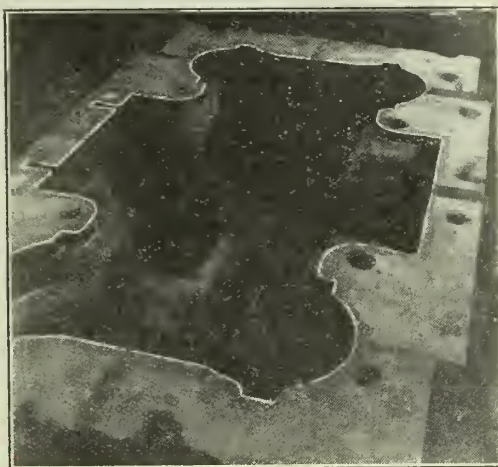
THE CARCASS OF A BED PLATE MOULD.
